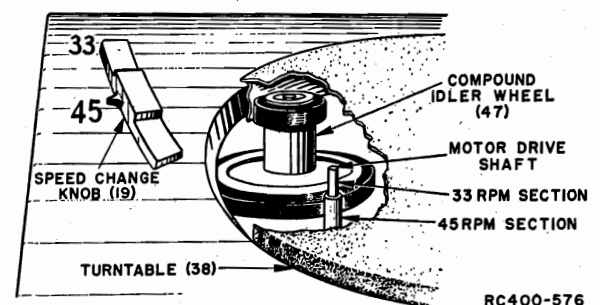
Compound Idler Wheel and Motor Drive Shaft.
